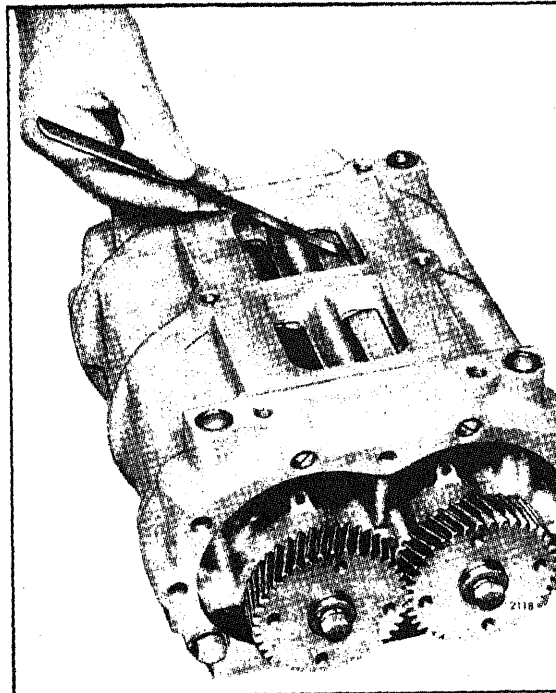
· Measuring Rotor Lobe to Housing Clearance
